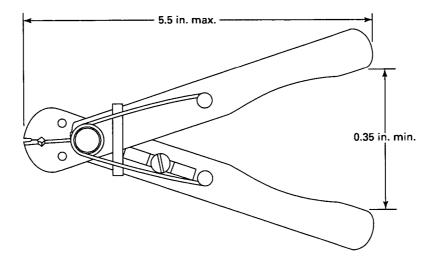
Type II, Class 4, Wire Cutter/Stripper, Small Frame, Strippers Forward of Pivot, Adjustable Size, With Spring and Lock Optional
